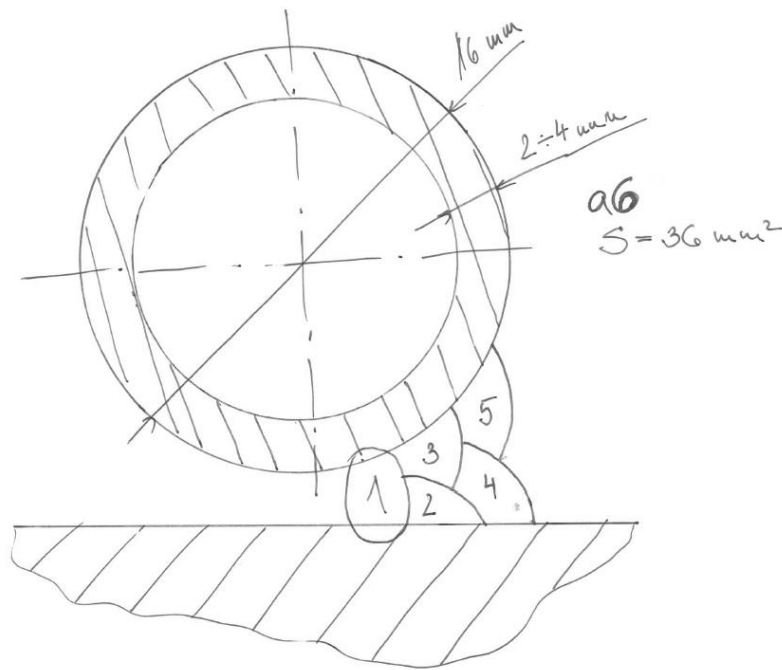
Weld for connection of heating pipes to vessel wall – schematics of weld passes deposition layout
